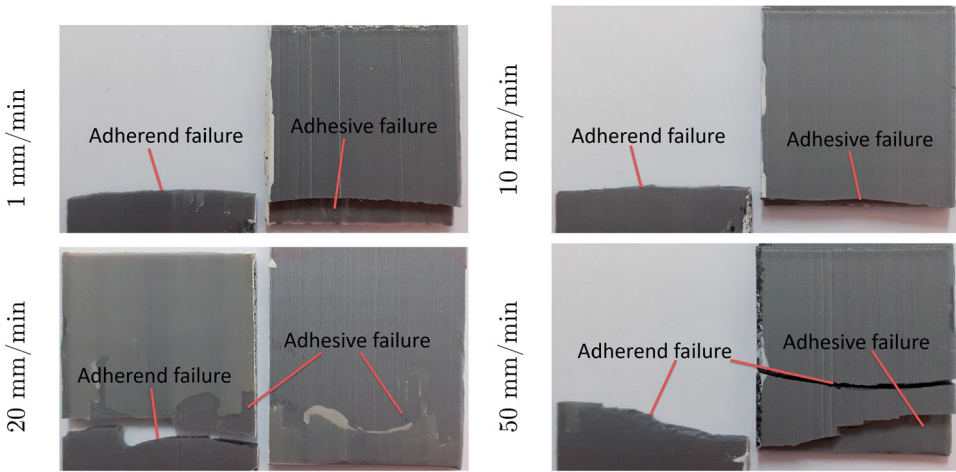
Fracture surfaces of 3D-printed PLA adhesive single-lap joints after tensile tests at different loading rates.
